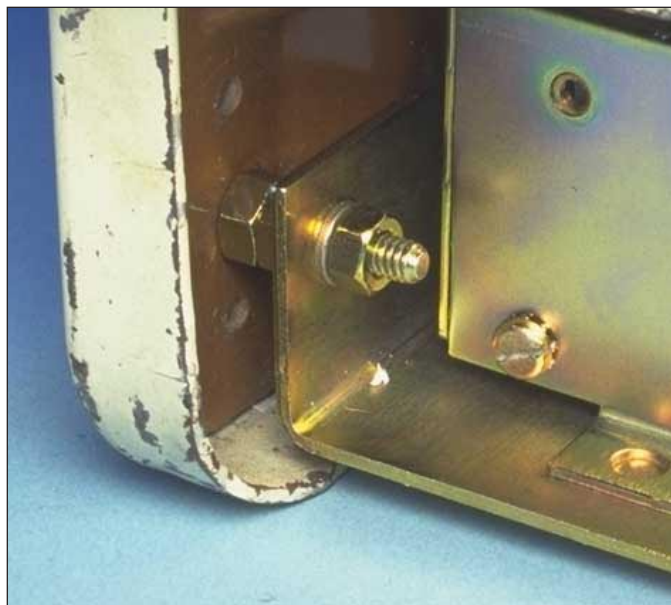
Aux. CT Module Assembly Mounted to the Breaker Back Plate
